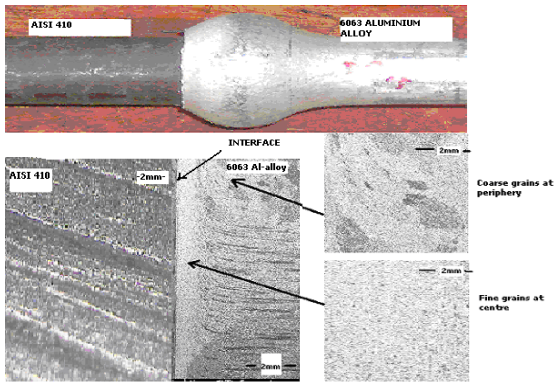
Typical Friction Weld and its Cross-Sectional View (24.4-146.34-1)
